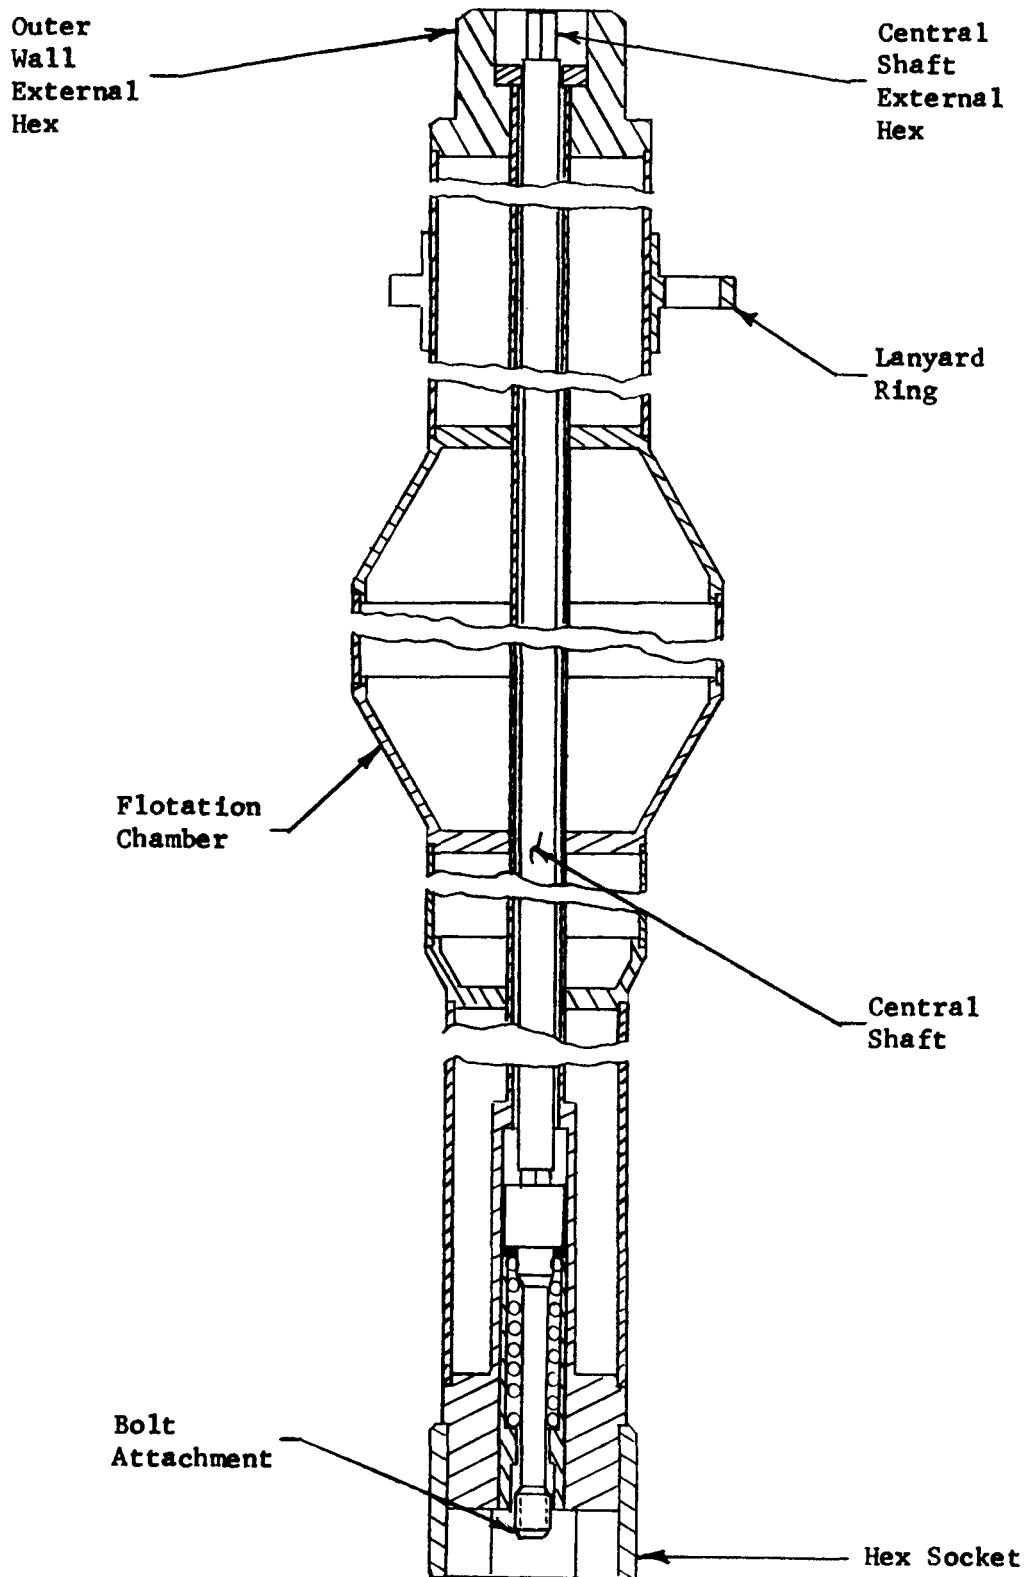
Peach Bottom Cask Top Closure Lid Bolt Handling and Torquing Tool
